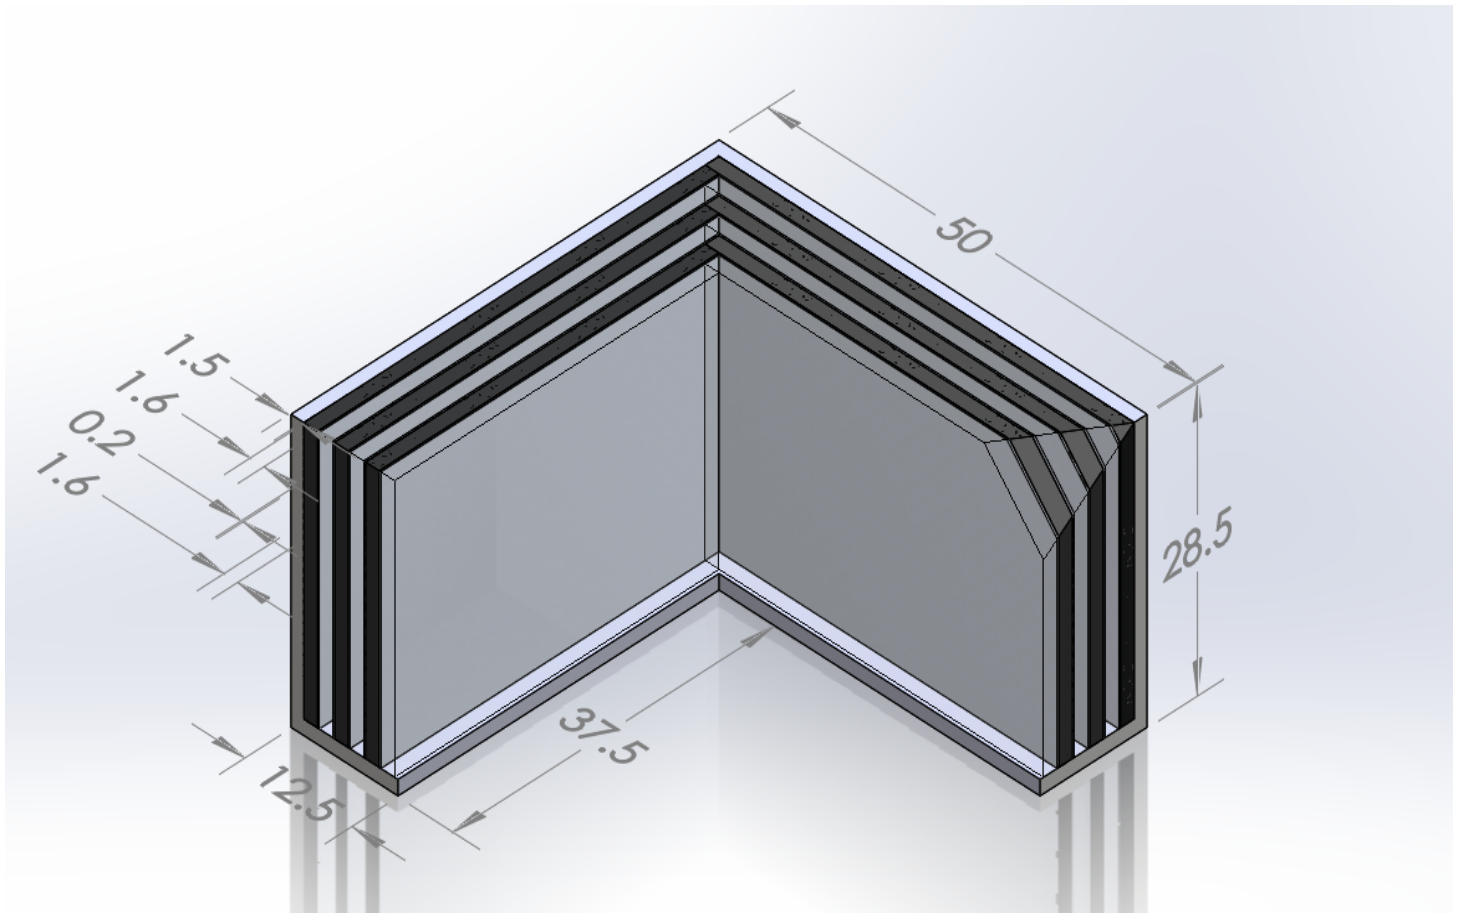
A trimetric view of the corner damper with a cutaway view on the upper right corner to better visualize the layers. Dimensions are in mm.
